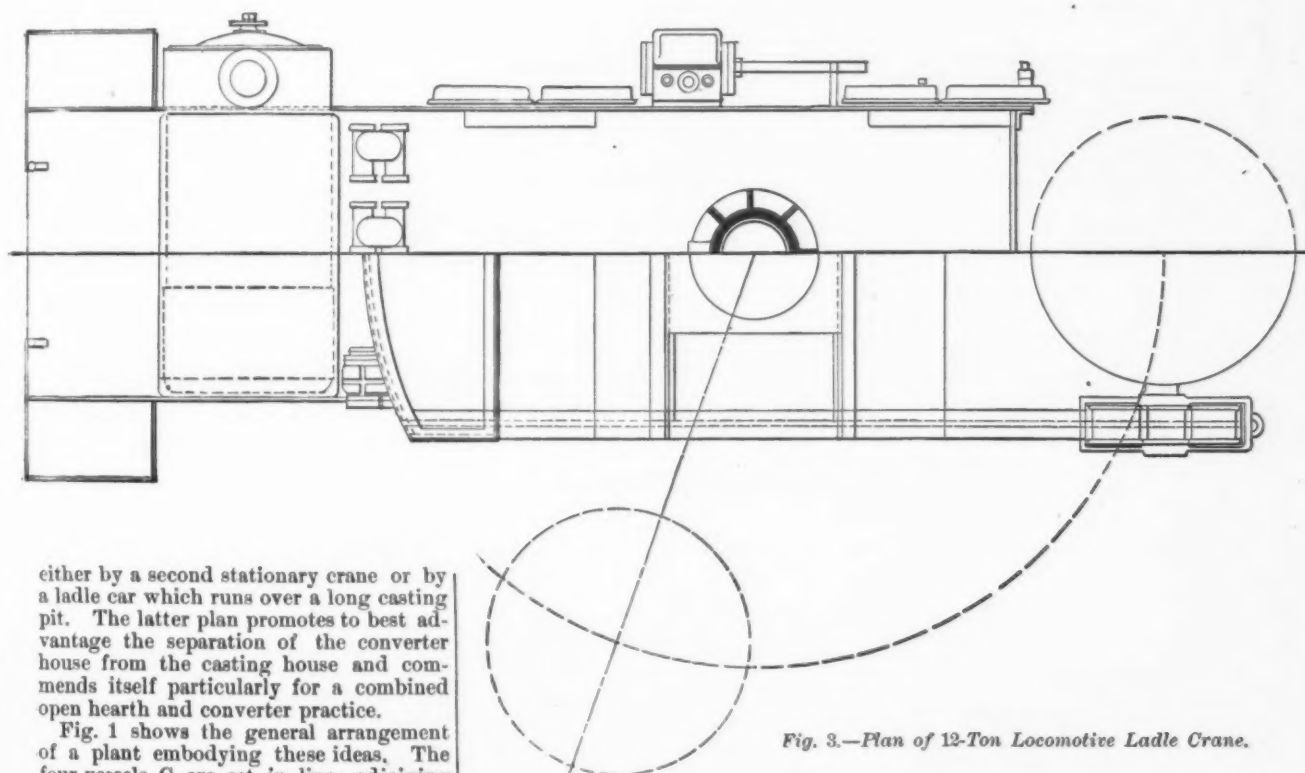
Plan of 12-Ton Locomotive Ladle Crane.
